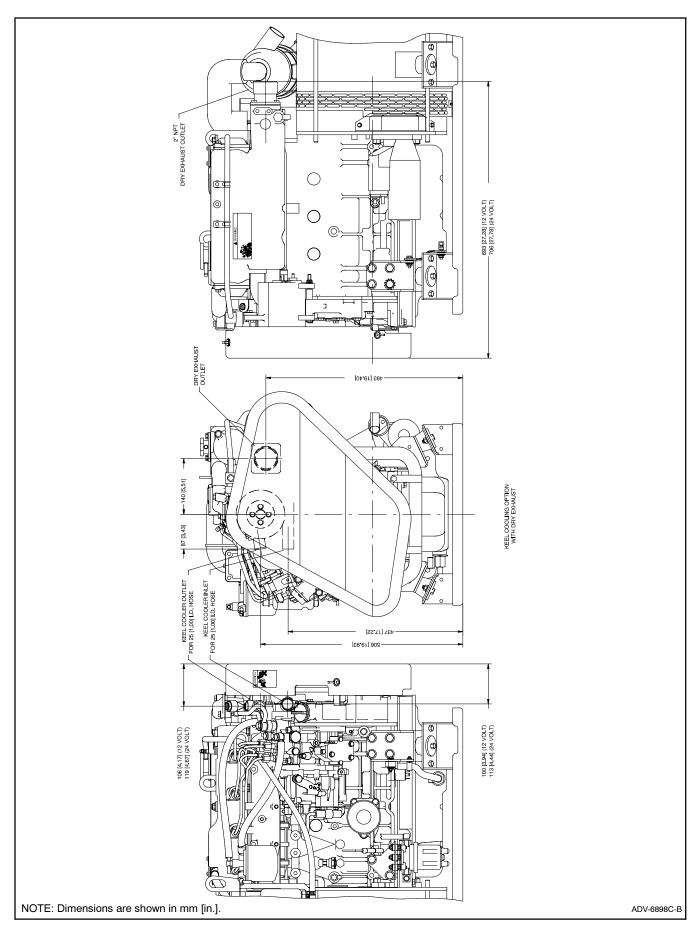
Dimension Drawing, 20EOZD and 17/17.5EFOZD with Keel Cooling
